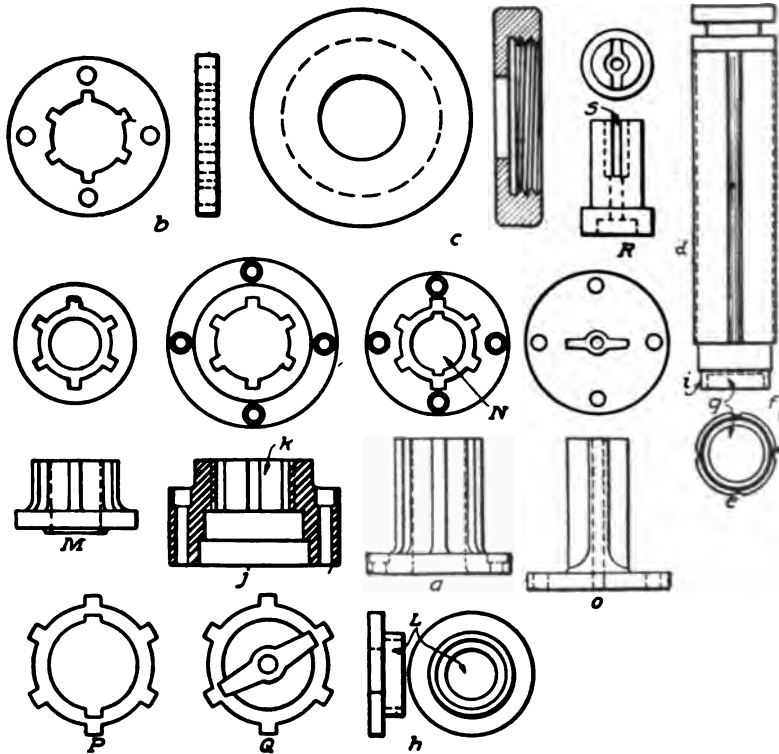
Sub Press parts: *a*—Blanking Punch and Piercing Die; *b*—Lower Stripper; *c*—Press Frame Cap; *d*—Plunger; *e*—Punch Holder; *f*—Blanking Die; *g*—Upper Stripper; *h*—Crossbar Punch; *i*—Section of Blanking Punch; *j*—Section of Assembled Blanking Punch; *k*—Piercing Punch
